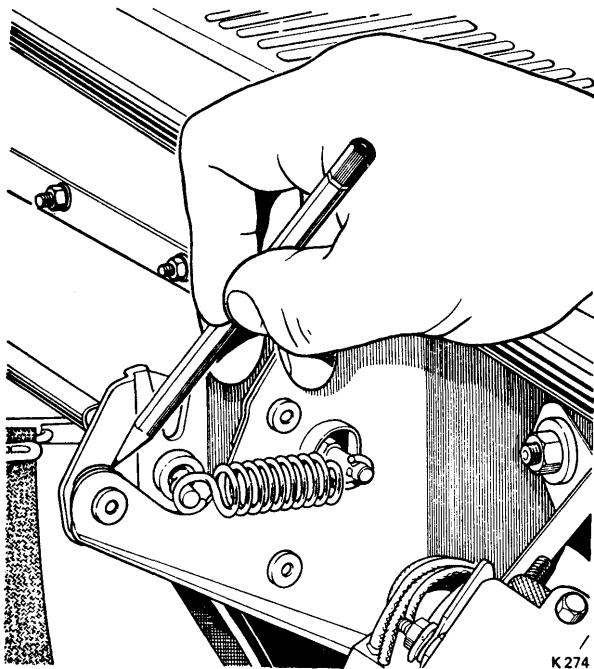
MARKING THE BONNET CATCH MECHANISM TO FACILITATE ASSEMBLY
